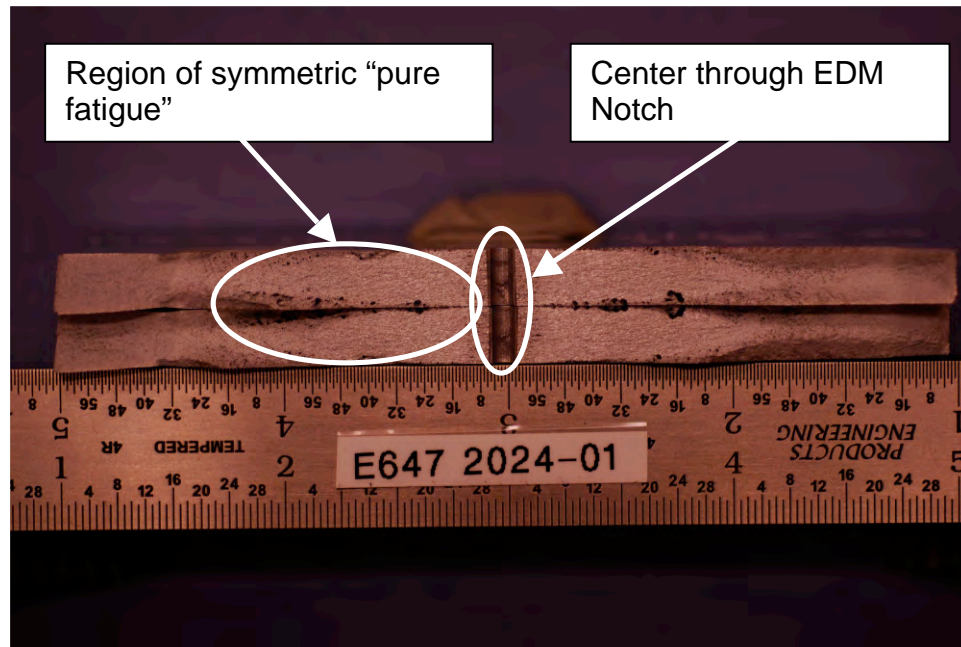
ASTM Standard E 647 CC 2024-01 middle tension fracture surfaces. Specimen tested at a σ_{\max} of 11.1ksi, $R = 0.1$, $f = 15$ Hz, and lab air.
